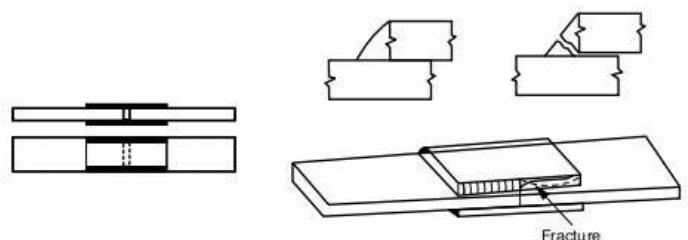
Fracture position in side fillet weld
